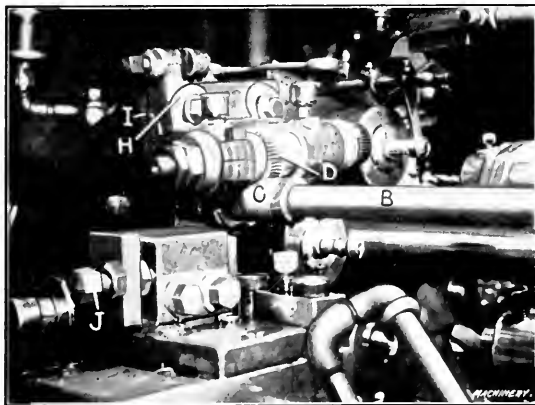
Hobbing Attachment in Place on Automatic Screw Machine
